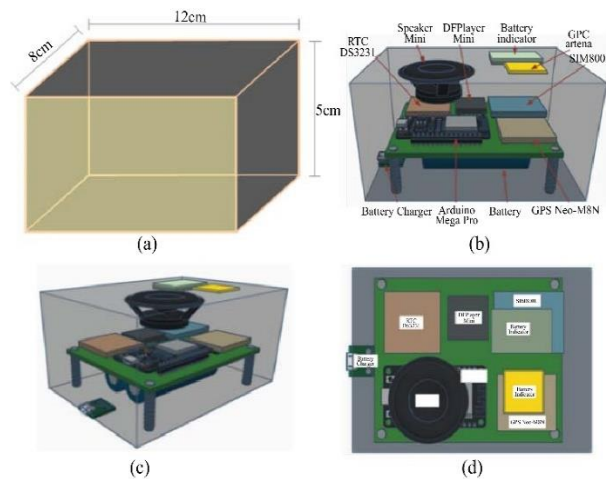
Mechanical design: (a) System equipment box design, (b) Front view, (c) Side view, and (d) Top view of component layout within the enclosure.
